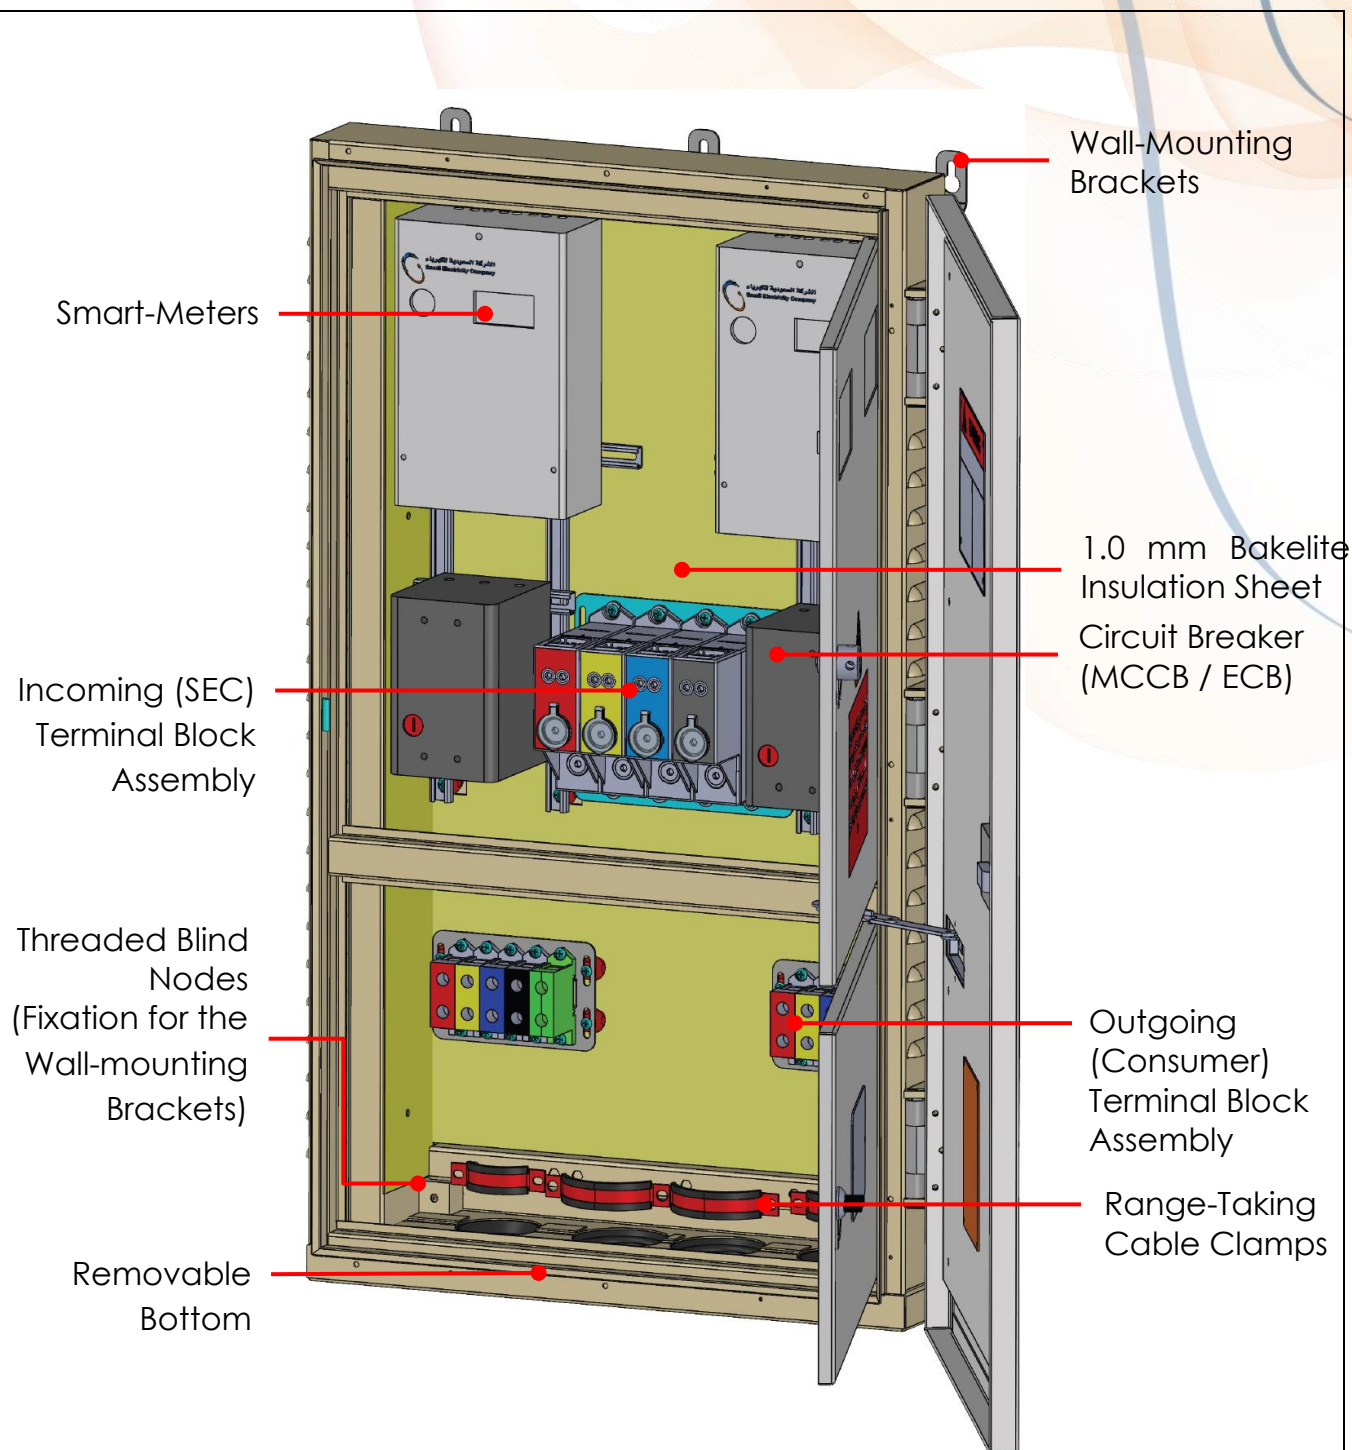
Layout Drawing of Double-Meterbox with Steel Enclosure with Main Door Opened
